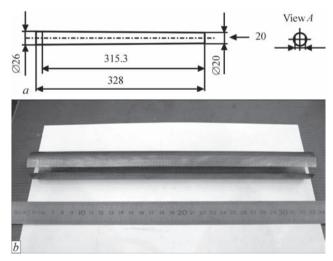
Sketch of tubular cone filter element of steel 08Kh18N10T ($\delta = 0.5$ and 0.6 mm) (*a*) and view (*b*) of billet being welded for its production
